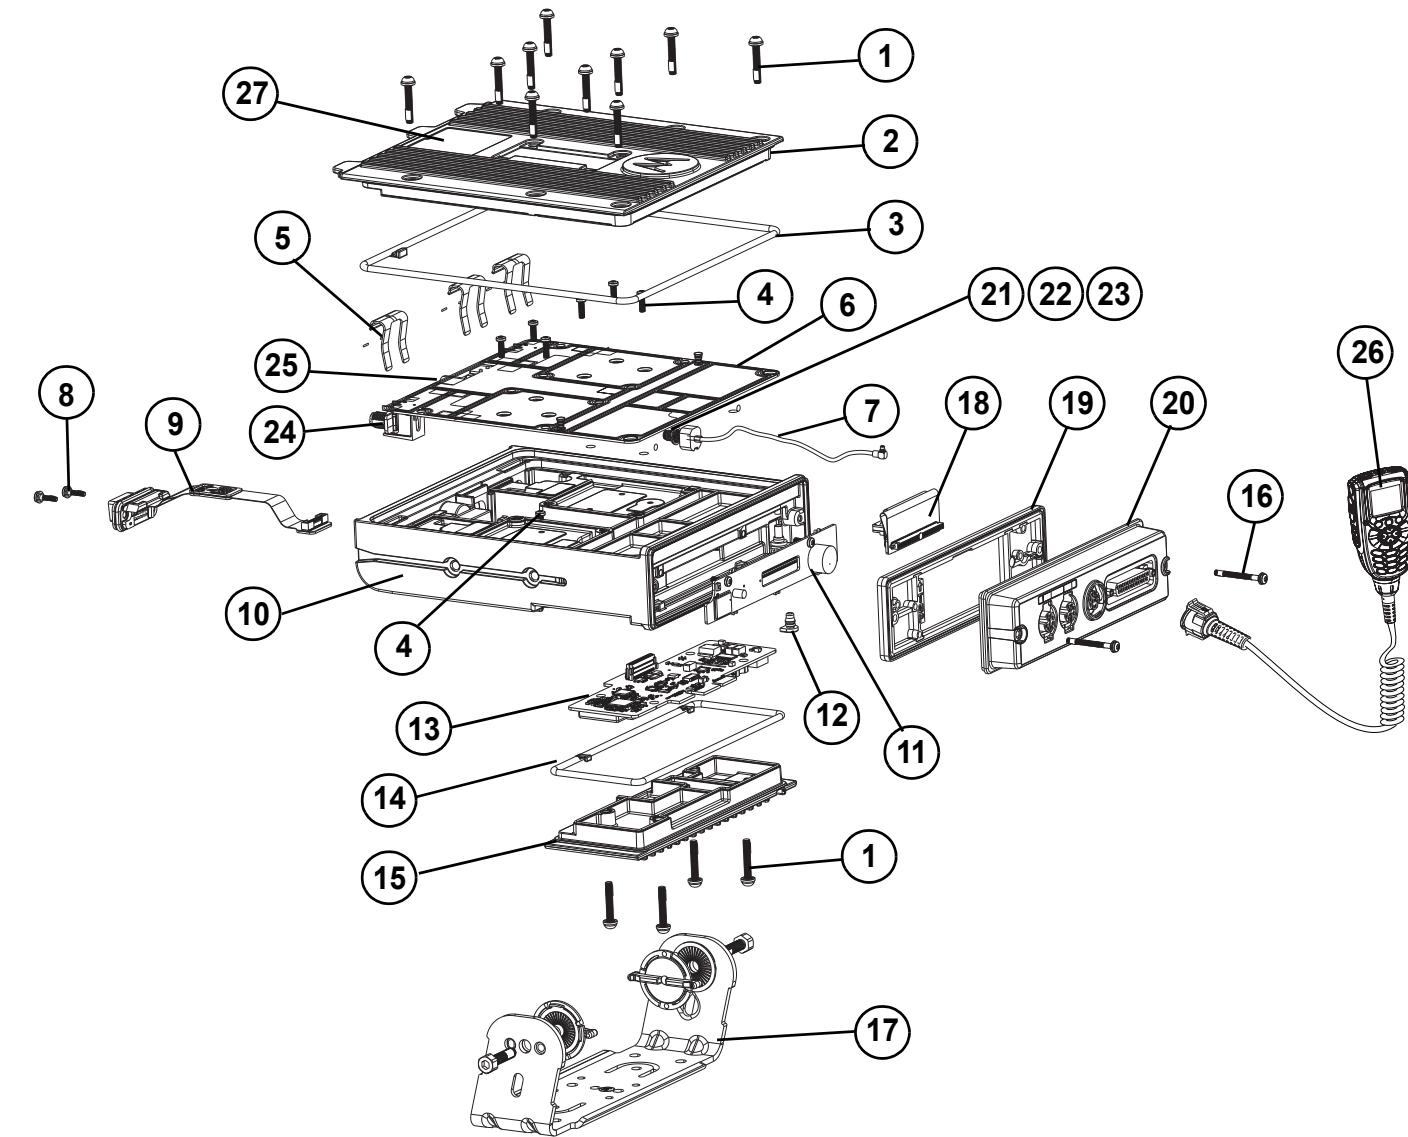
APX 5500 / 6500 / 7500 / 6500 Li O3 Radio Exploded View
